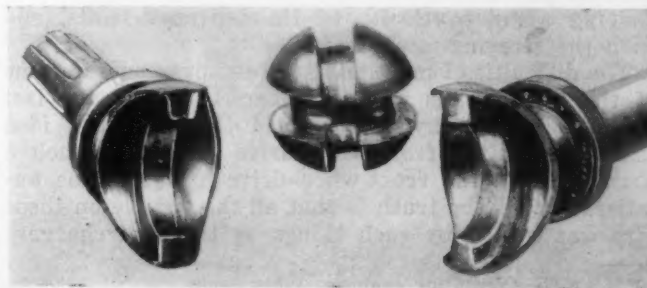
TYPE OF FRONT-DRIVE UNIVERSAL-JOINTS USED IN CHICAGO MOTORCOACHES
